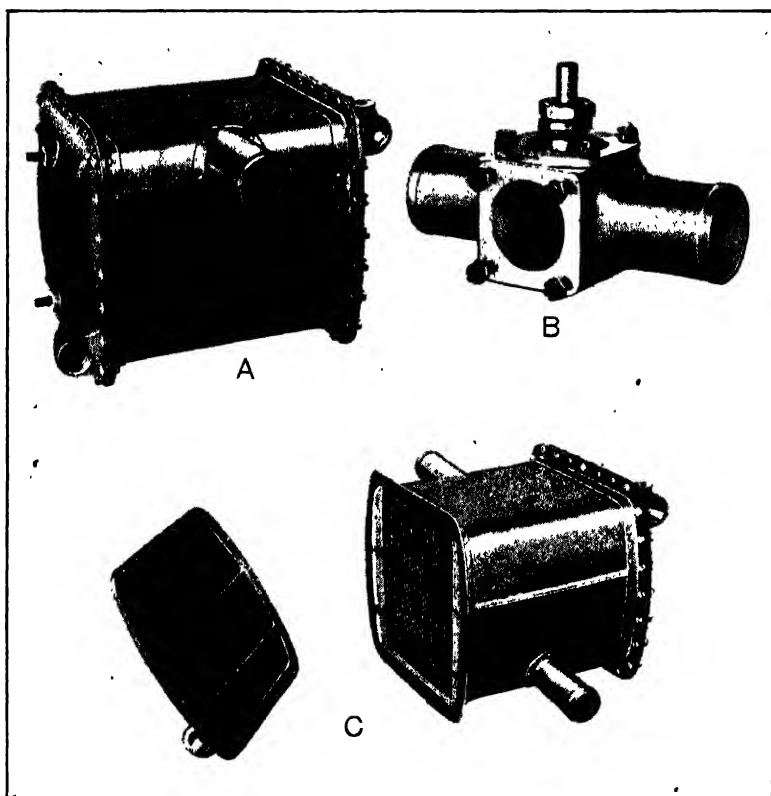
Parts of Wright Oil Temperature Control System. A—Heat Transfer Unit or Oil Cooler. B—Three Way Valve. C—Heat Transfer Unit with End Plate Removed.
